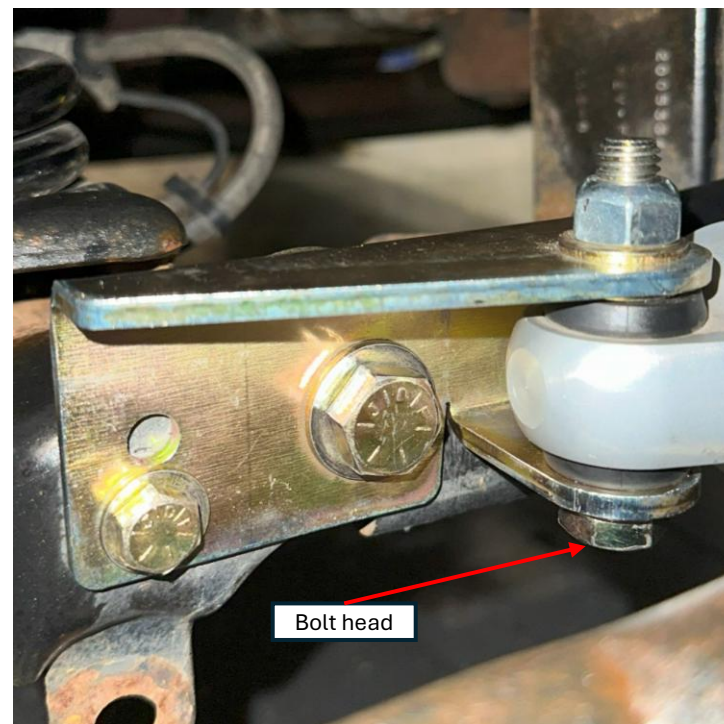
Steering stabilizer installed with the bolt head on the bottom of the bracket, and spacer washer installed
